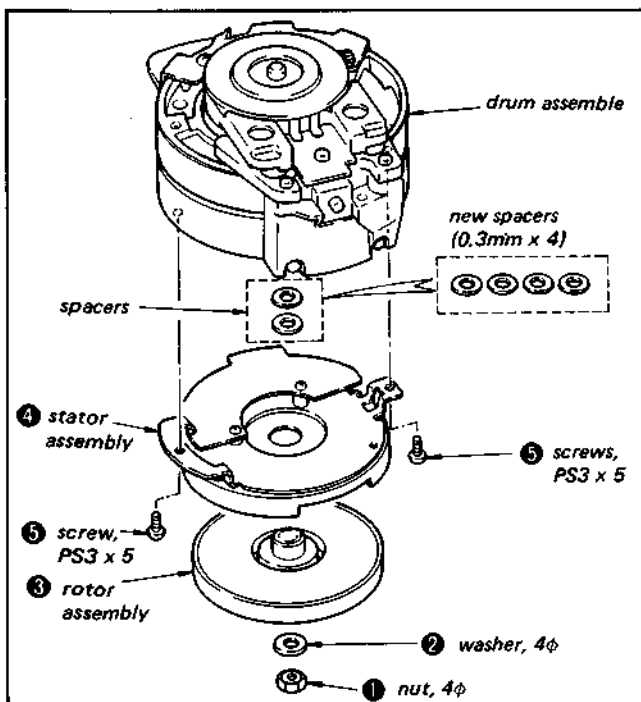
Removal of the stator and rotor when replacing the drum
